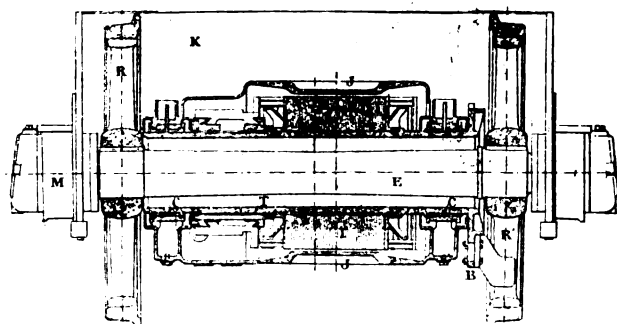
MOTOR MOUNTED ON AXLE, HEILMANN ELECTRIC LOCOMOTIVE.
